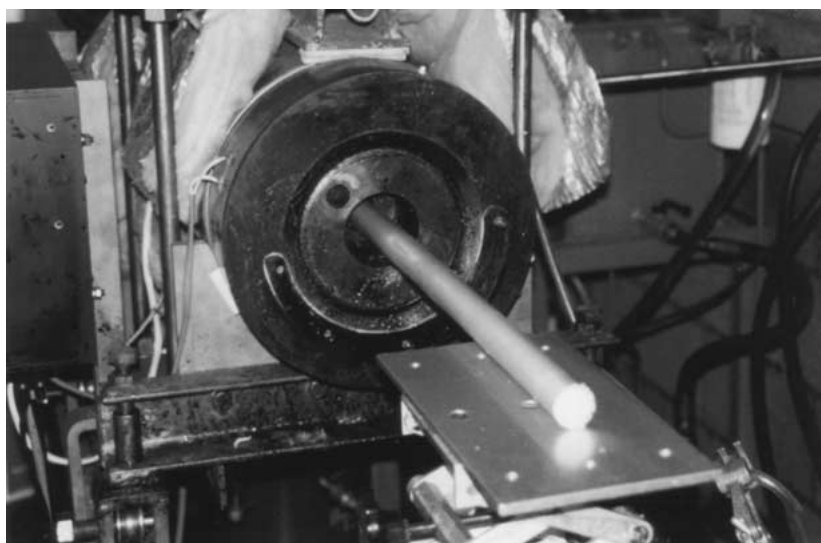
Extrusion apparatus showing 25 mm extrusion in progress.
